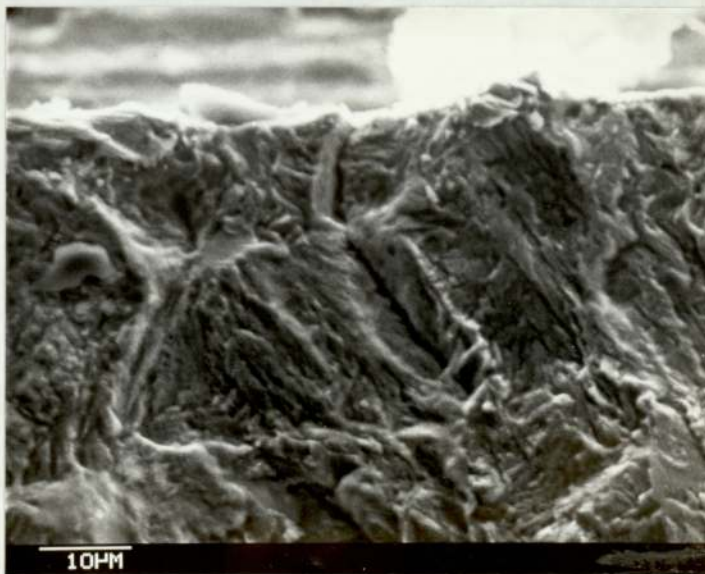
Fatigue fracture of carburised case at the notch root, case depth 0.38 mm, root radius 0.13 mm,
